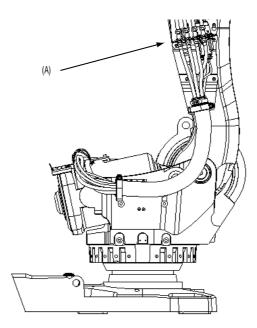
DressPack Lower arm left side view Spot Welding (option 778-2 and option 798-2).
